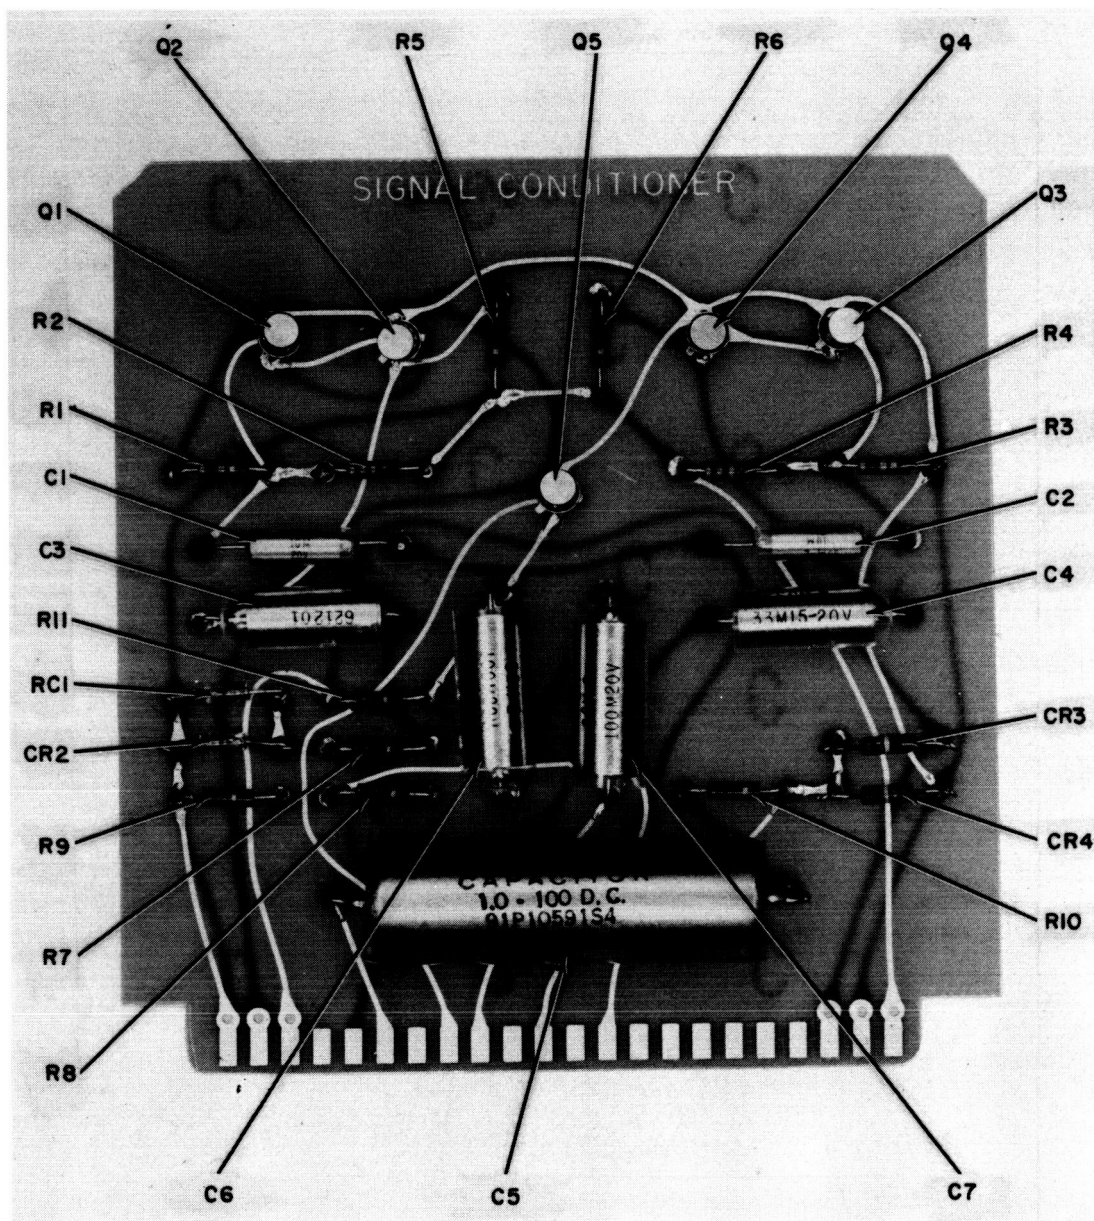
Signal Conditioner Board No. 1, Component Locations
